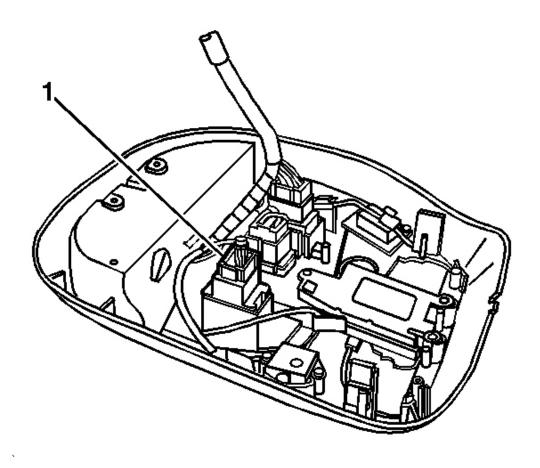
Locating Quarter Window Switch Electrical Connector Courtesy of GENERAL MOTORS CORP.
